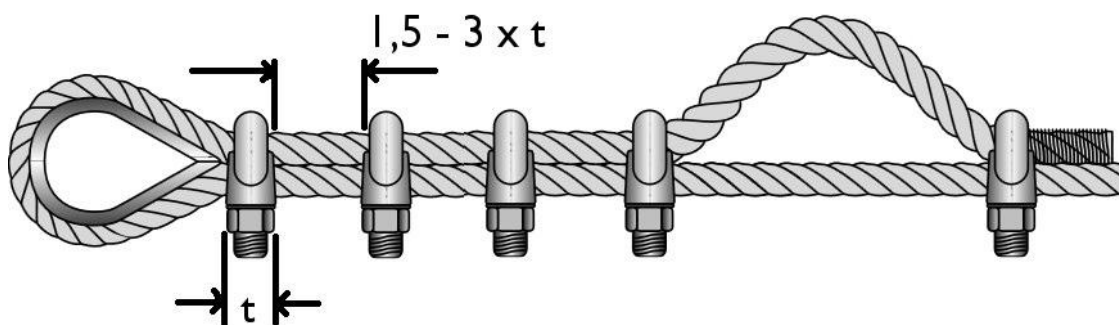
Proper installation of the cable clamps according to DIN EN 13411, with an additional cable clamp
